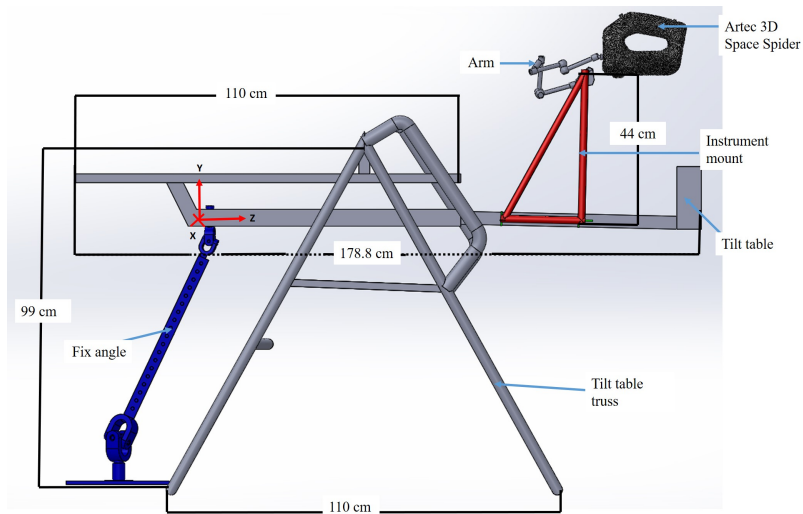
SOLIDWORKS CAD of the tilt table, fix angle device, and instrument mount with Artec 3D Space Spider, horizontal
